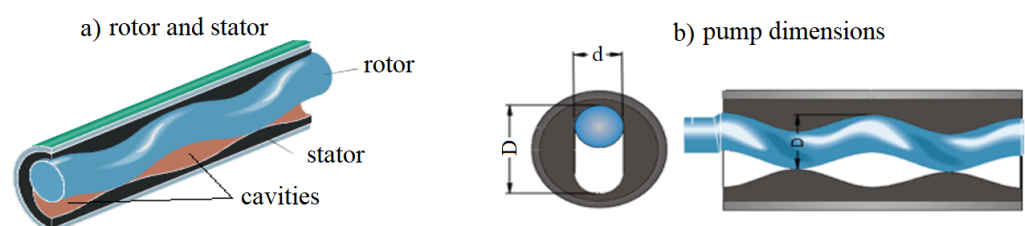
Rotor and stator with their dimensions: a) Rotor and stator; b) Pump dimensions.
